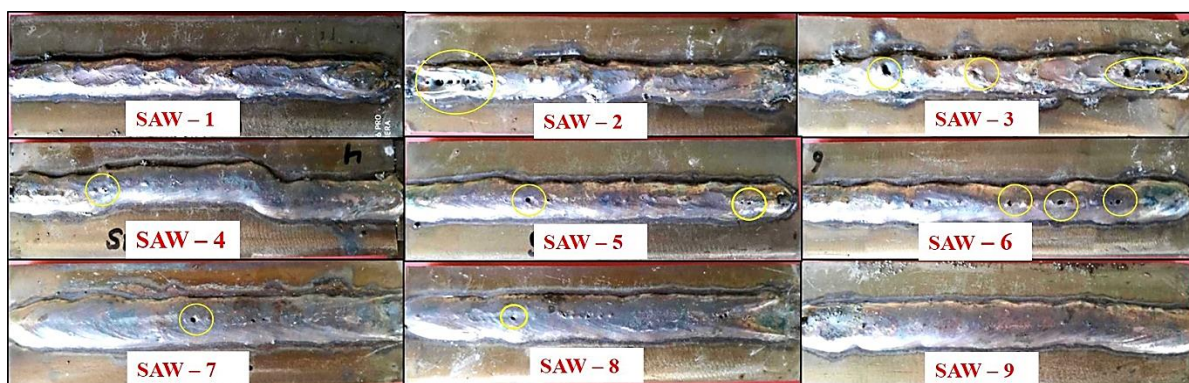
Weld-bead appearance of SAW coupons (1 To 9)
